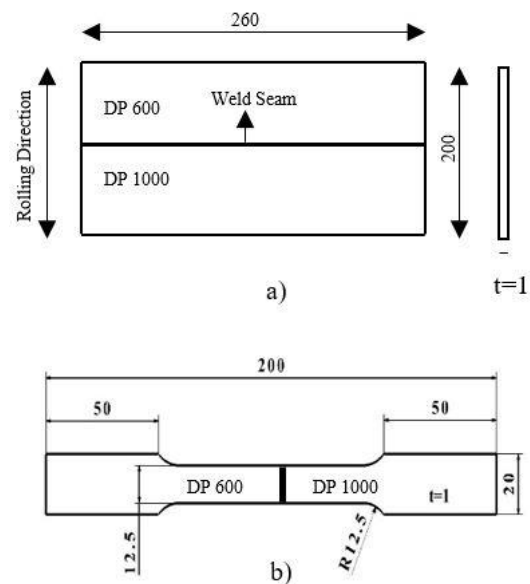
a) Nd:YAG laser welded DP600 steel-DP1000 steel sheets; b) The tensile test specimen.
